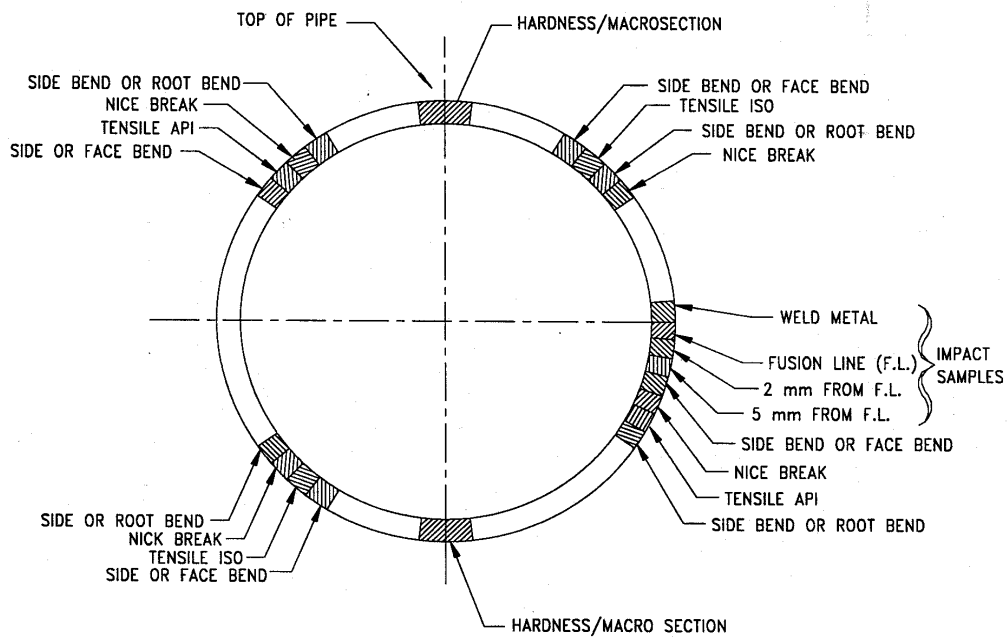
A. LOCATION OF SPECIMENS FOR WELD PROCEDURE
